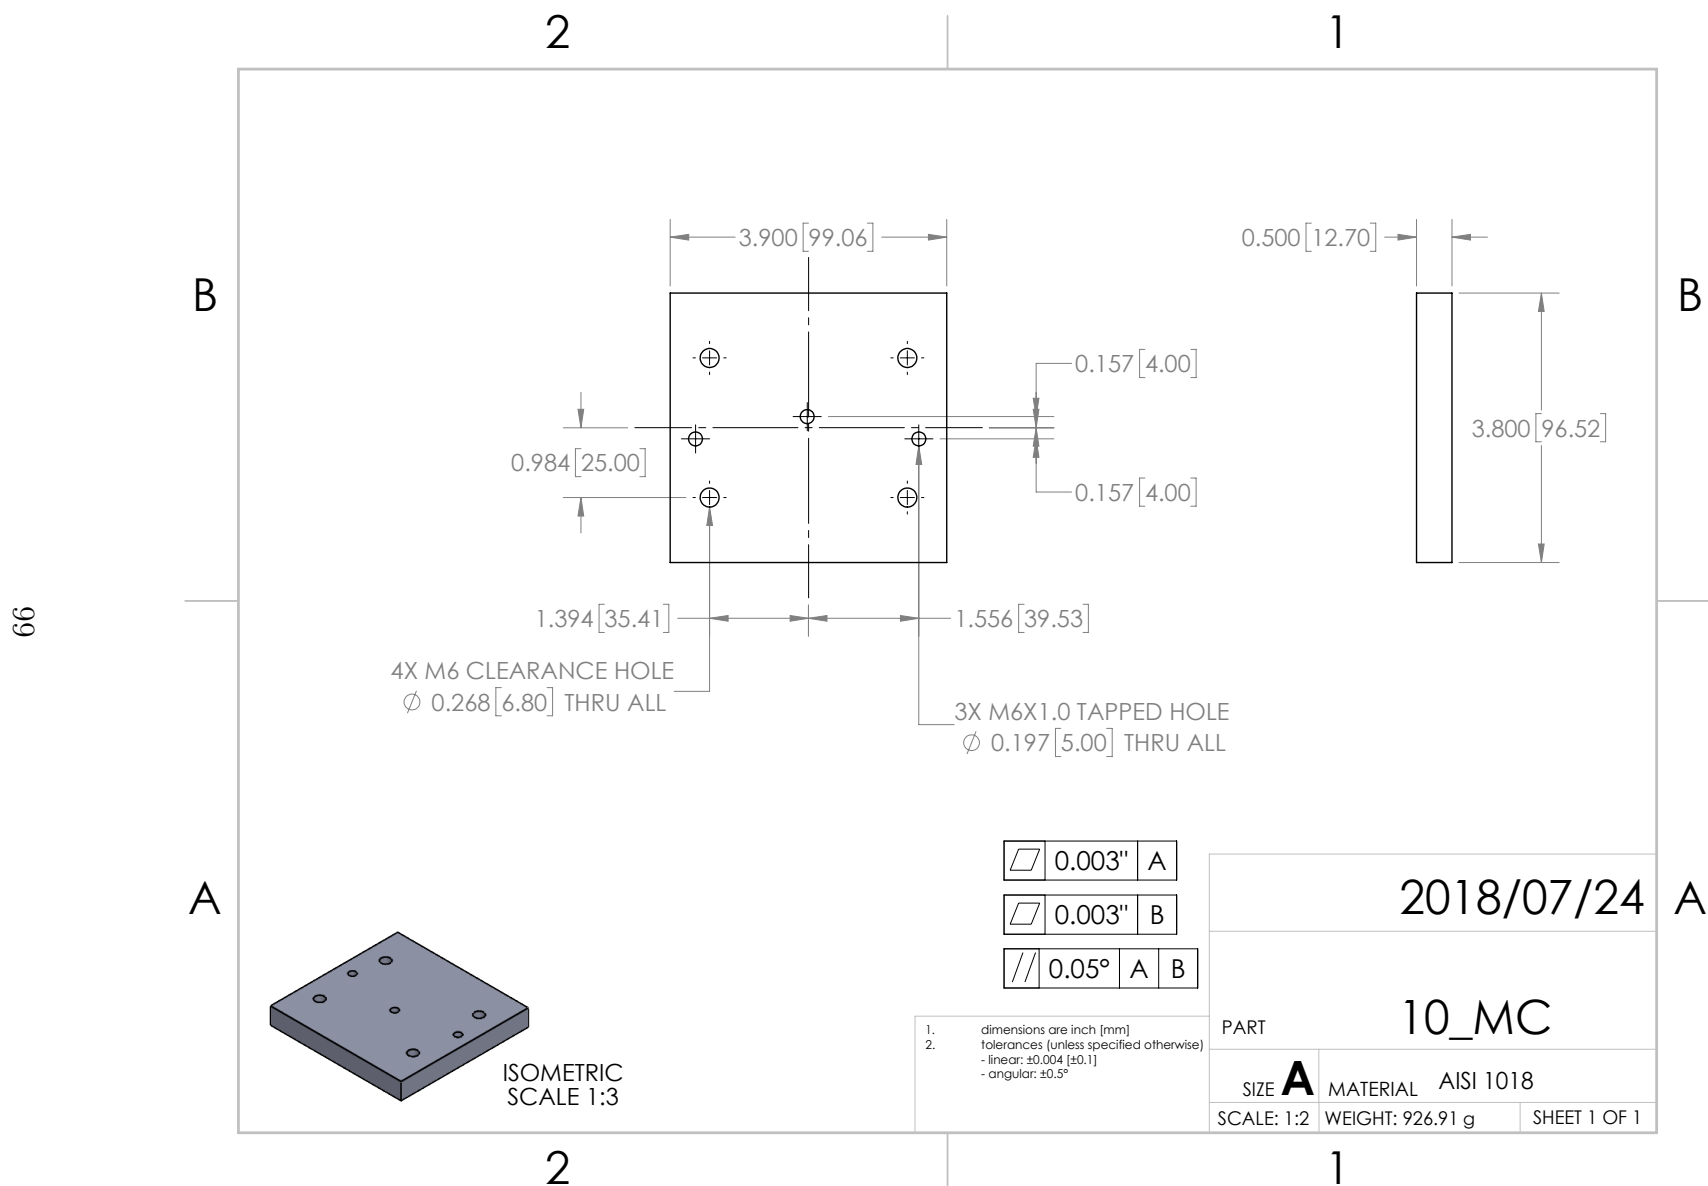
Fixture plate between the fixture arm (09_MC) and the actuator.
